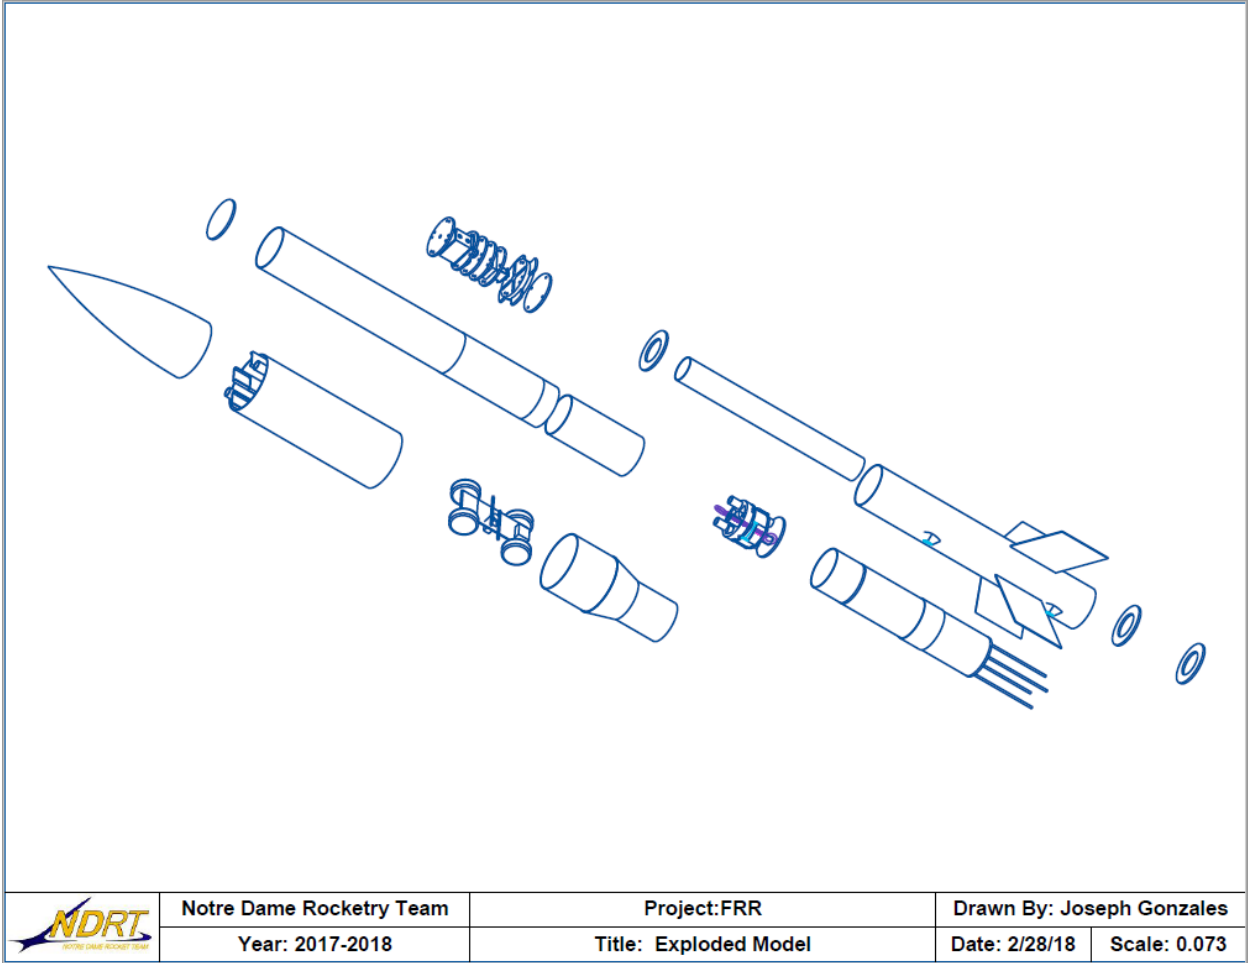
Exploded drawing of the overall Launch Vehicle. Units in inches.
